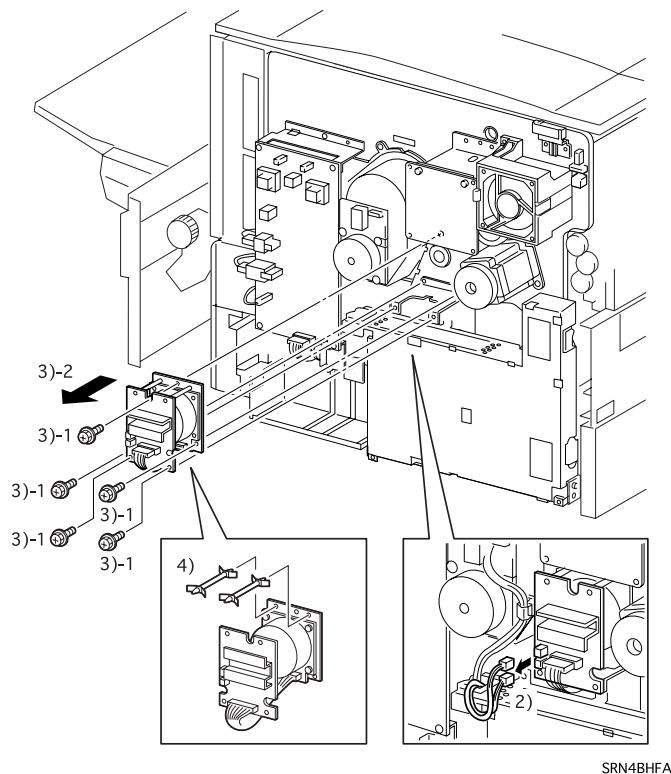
P/H MOTOR ASSEMBLY Removal
